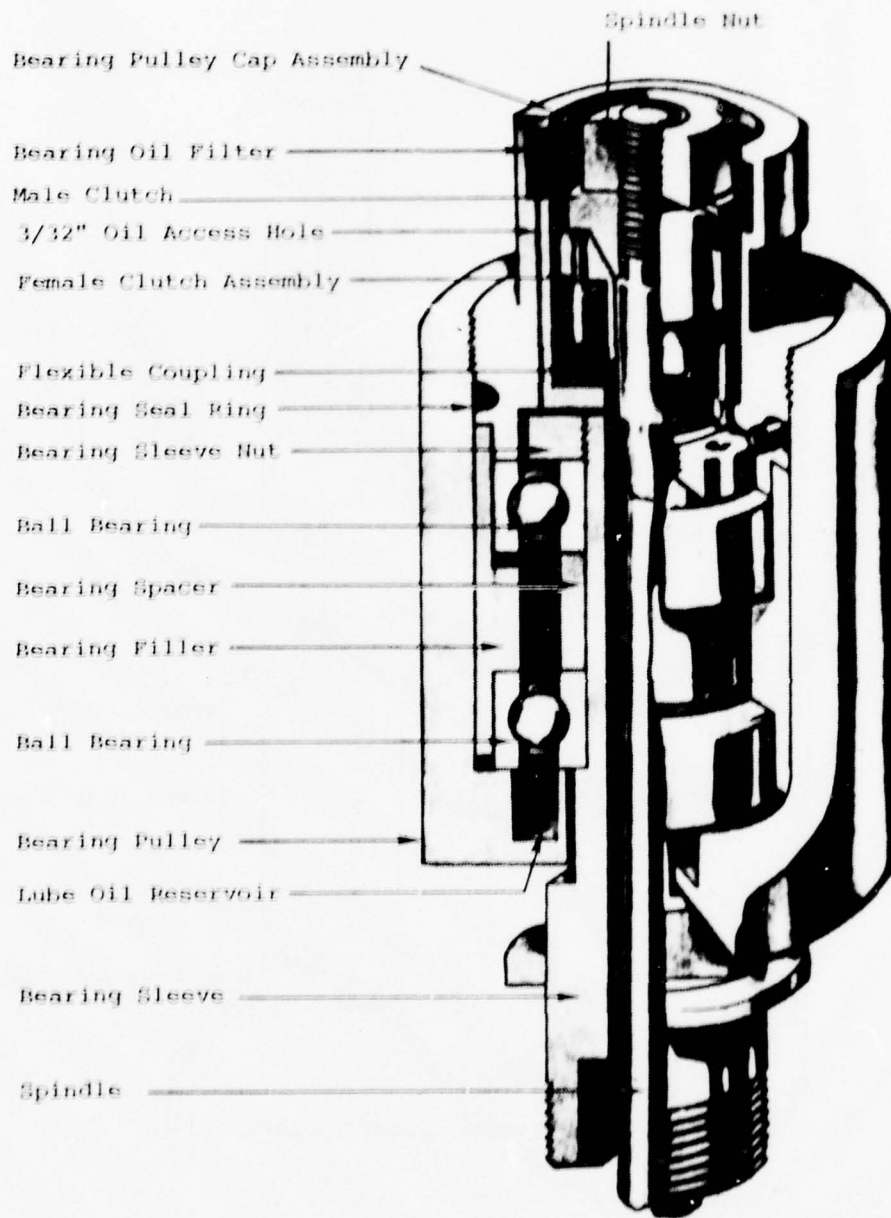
SPINDLE BEARING ASSEMBLY (from NAVSHIPS Technical Manual 0945-003-6010, Figure 37, p. 4-7)
